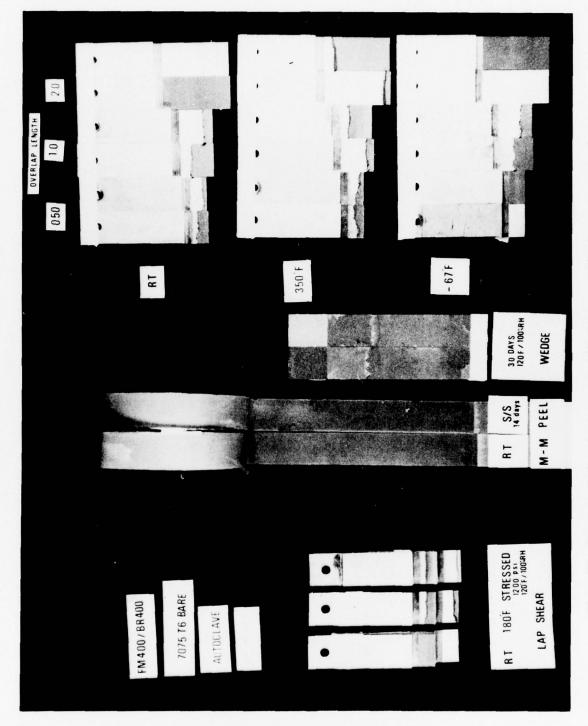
Specimen Failure Surfaces—FM 400, Optimized FPL Etch, Autoclave 3onds
